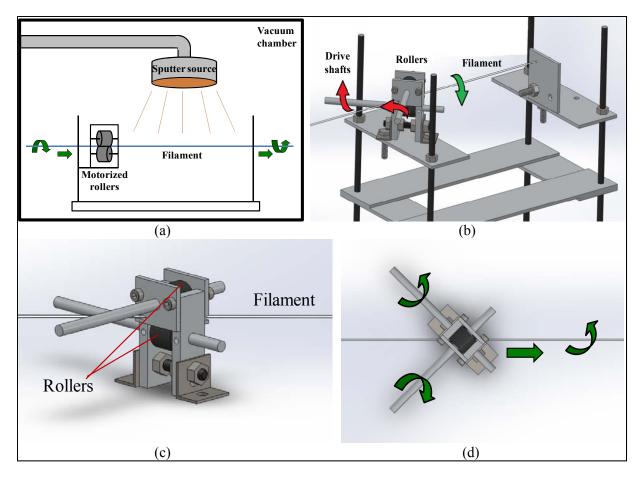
(a) Diagram of double-roller apparatus 2 inside vacuum chamber with MSD source; (b) rendering of double-roller apparatus 2; (c) side, and (d) top detail of roller assembly of apparatus 2.
